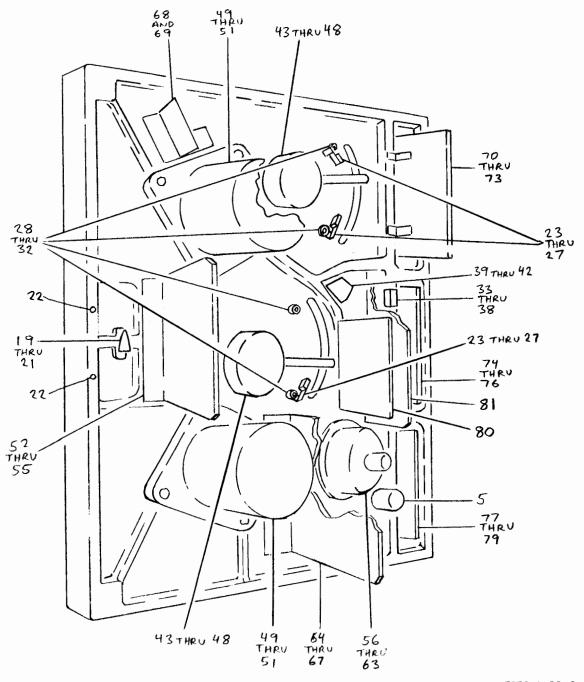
Tape Deck Assembly (Sheet 1 of 2)
